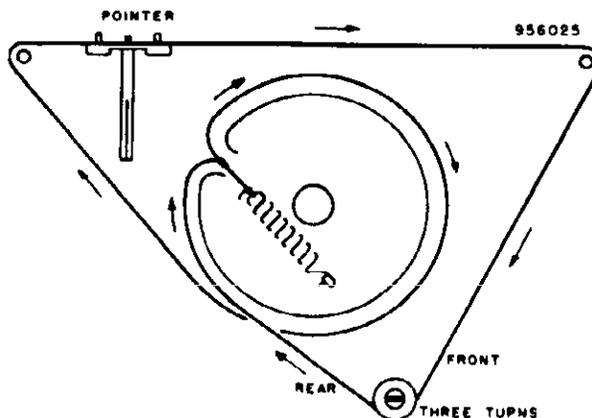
DIAL CORD STRINGING FOR CHASSIS 120125-B
